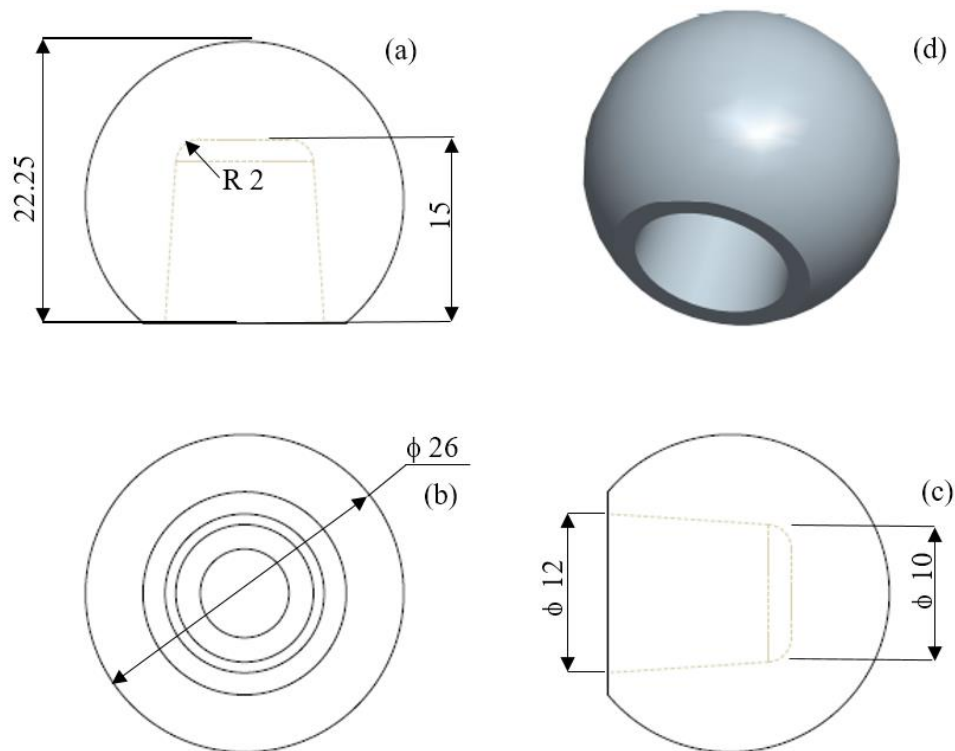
Projected orthographic view (a) top view (b) front view (c) side view and (d) isometric view of the selected femoral head
